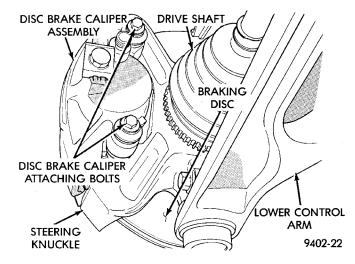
Front Disc Brake Caliper Assembly Bolts
